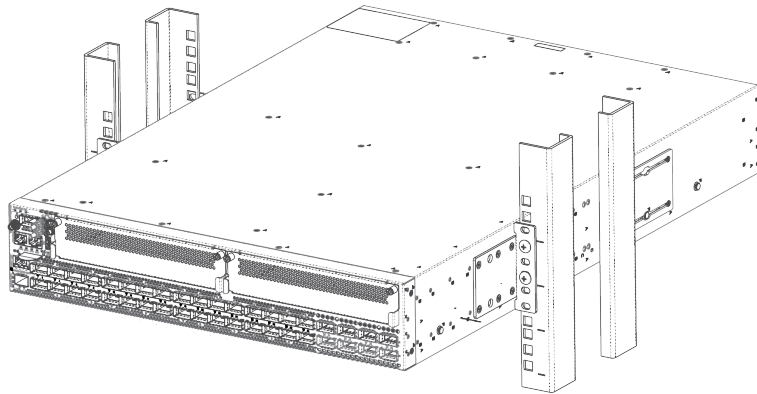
Mid-Mount: Attaching Short Mounting Brackets
